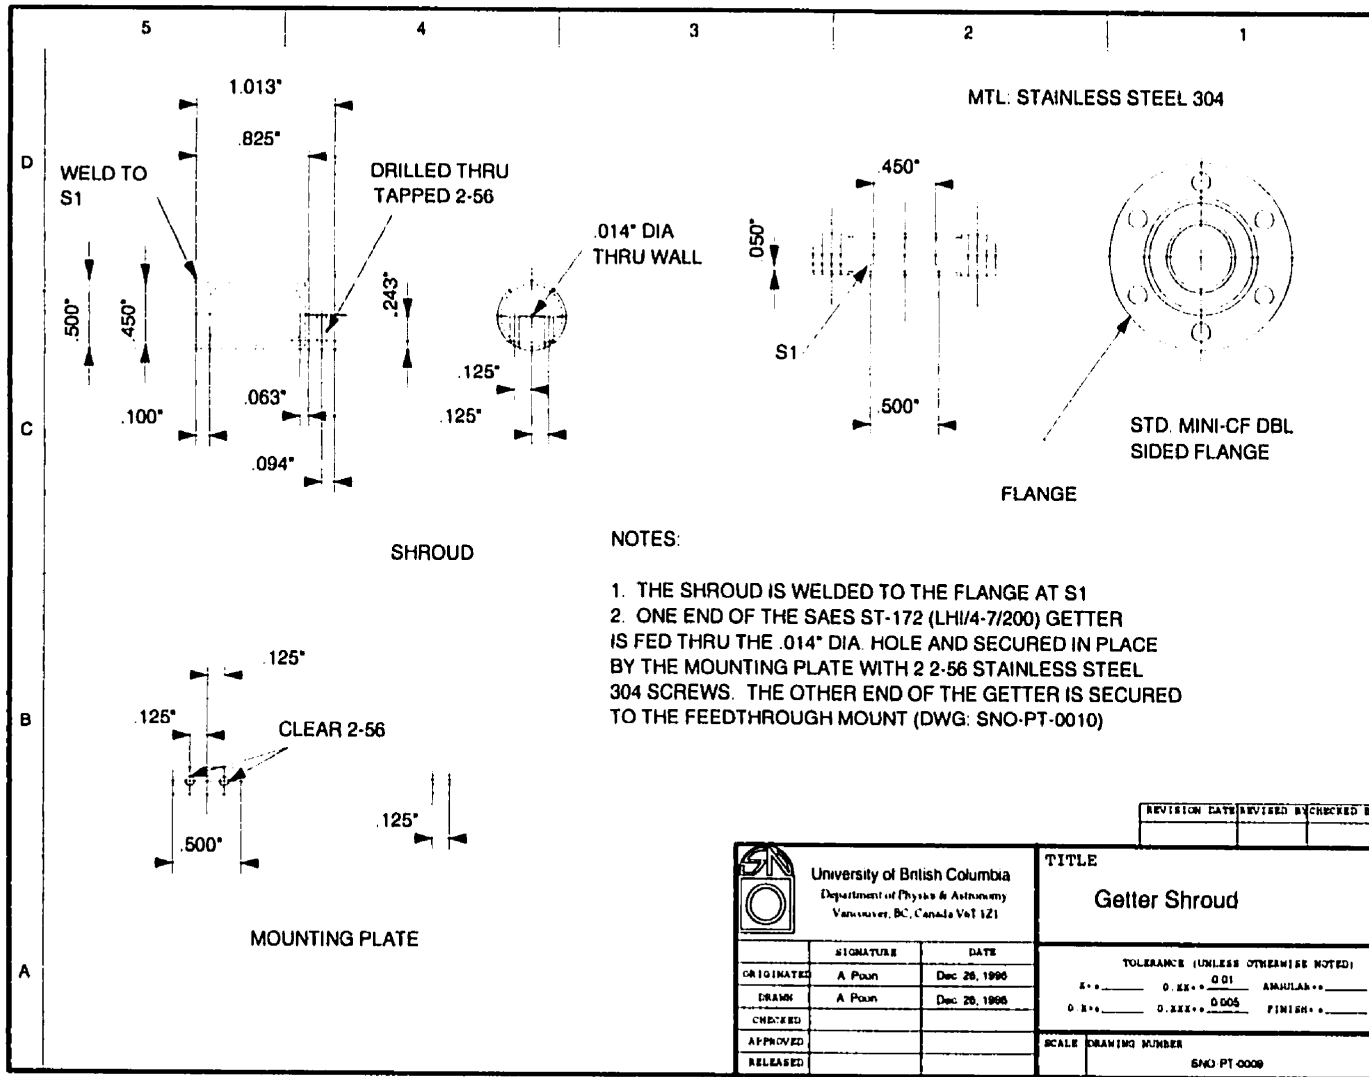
Technical drawing of the getter shroud. (SNO-PT-0009).
